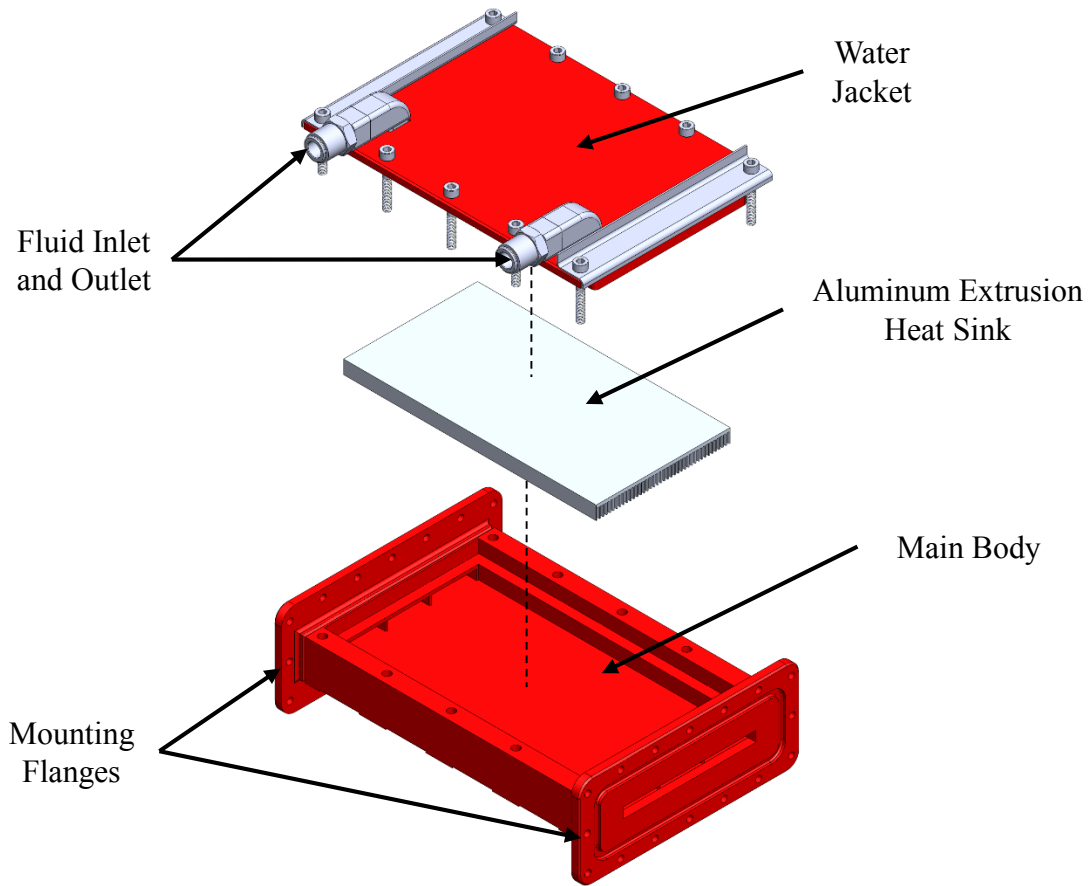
Exploded view of the solid model of the Mark 2's heat exchanger assembly.
